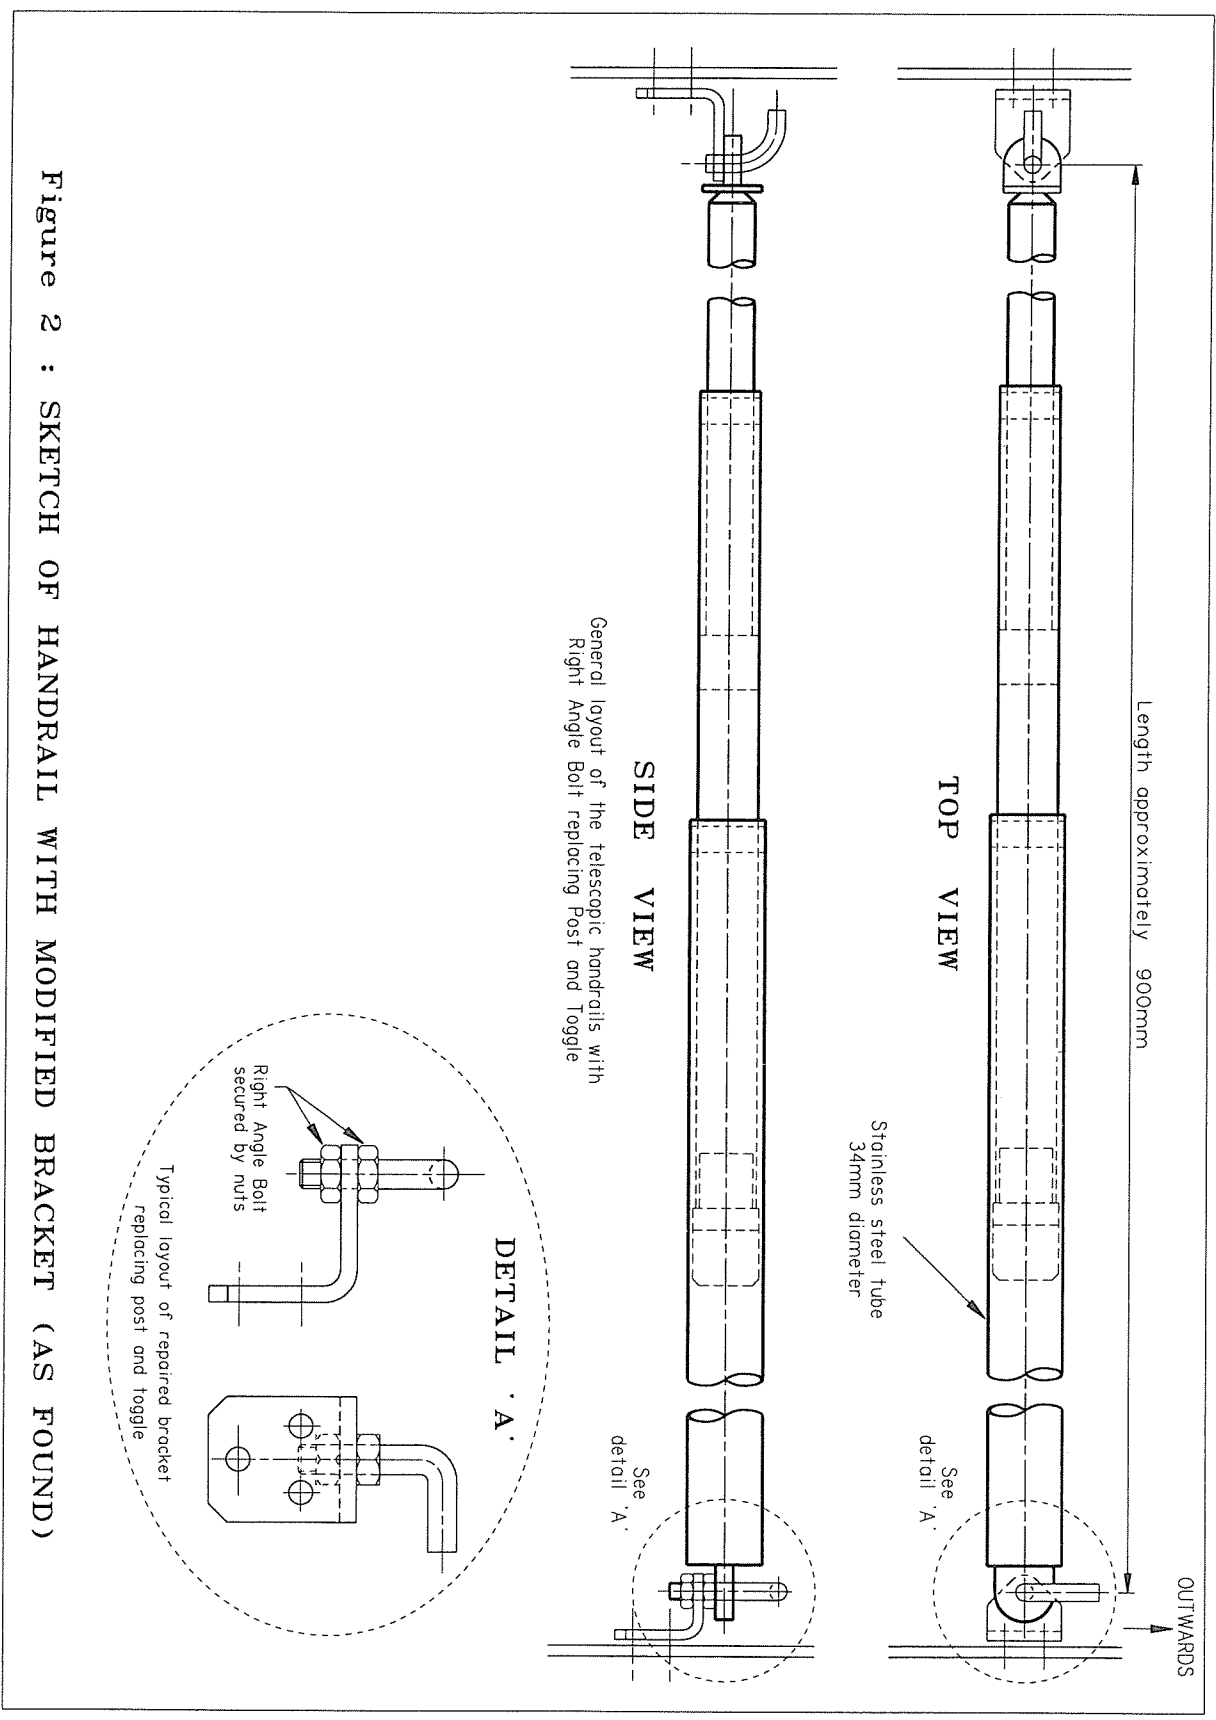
SKETCH OF HANDRAIL WITH MODIFIED BRACKET (AS FOUND)
